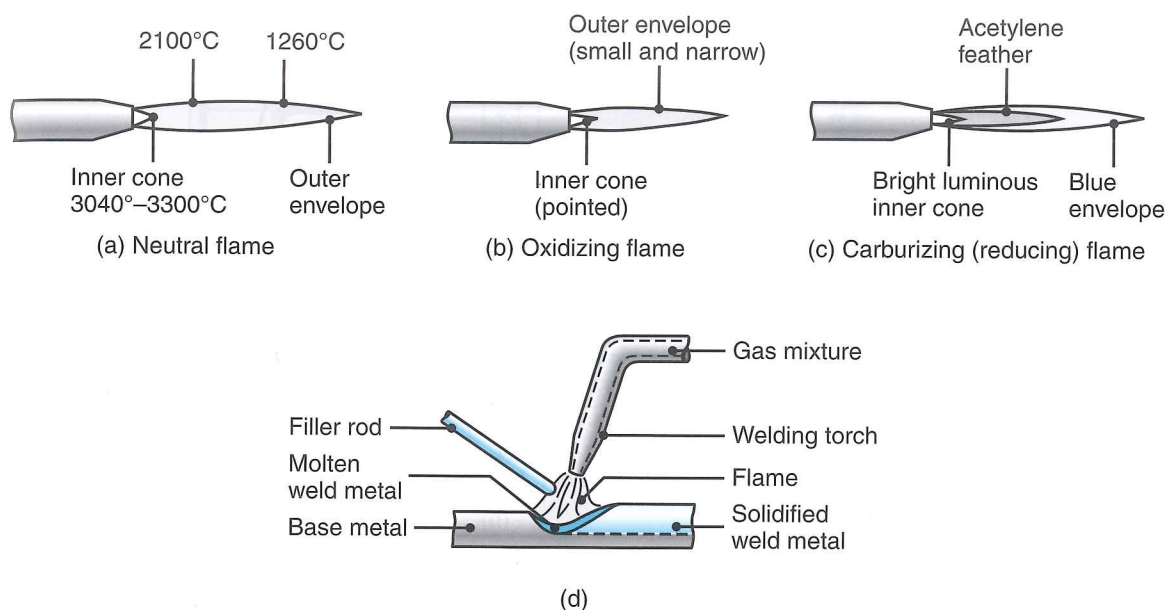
Three basic types of oxyacetylene flames used in oxyfuel-gas welding and cutting operations: (a) neutral flame; (b) oxidizing flame; and (c) carburizing, or reducing, flame. The gas mixture in (a) is basically equal volumes of oxygen and acetylene. (d) The principle of the oxyfuel-gas welding process.
